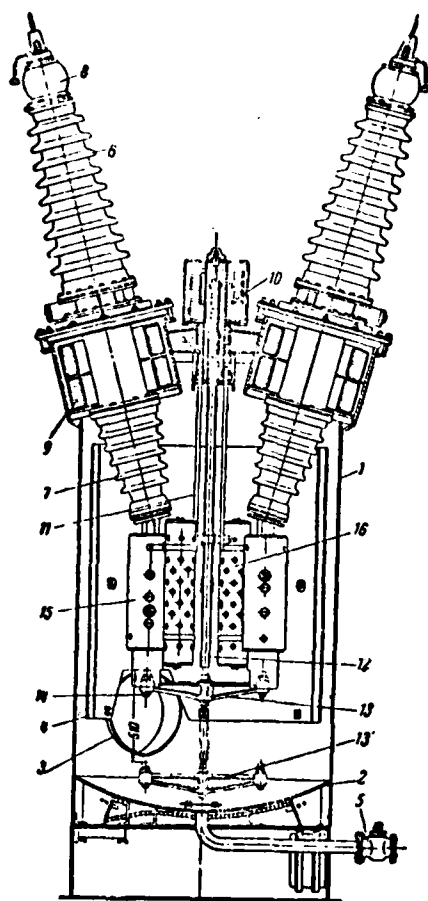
An oil breaker of the type MKP-110H on 110 kV, 600 A, 3500 MVA (one phase). 1 - tank; 2 - bottom of the tank; 3 - access; 4 - insulation of the tank; 5 - oil-drain valves; 6 and 7 - upper and lower parts of wall entrance insulator; 8 - glass expander; 9 - built-in current transformers; 10 - drive mechanism; 11 - guide; 12 - insulating rod; 13 - contact crosshead (13') - position is
